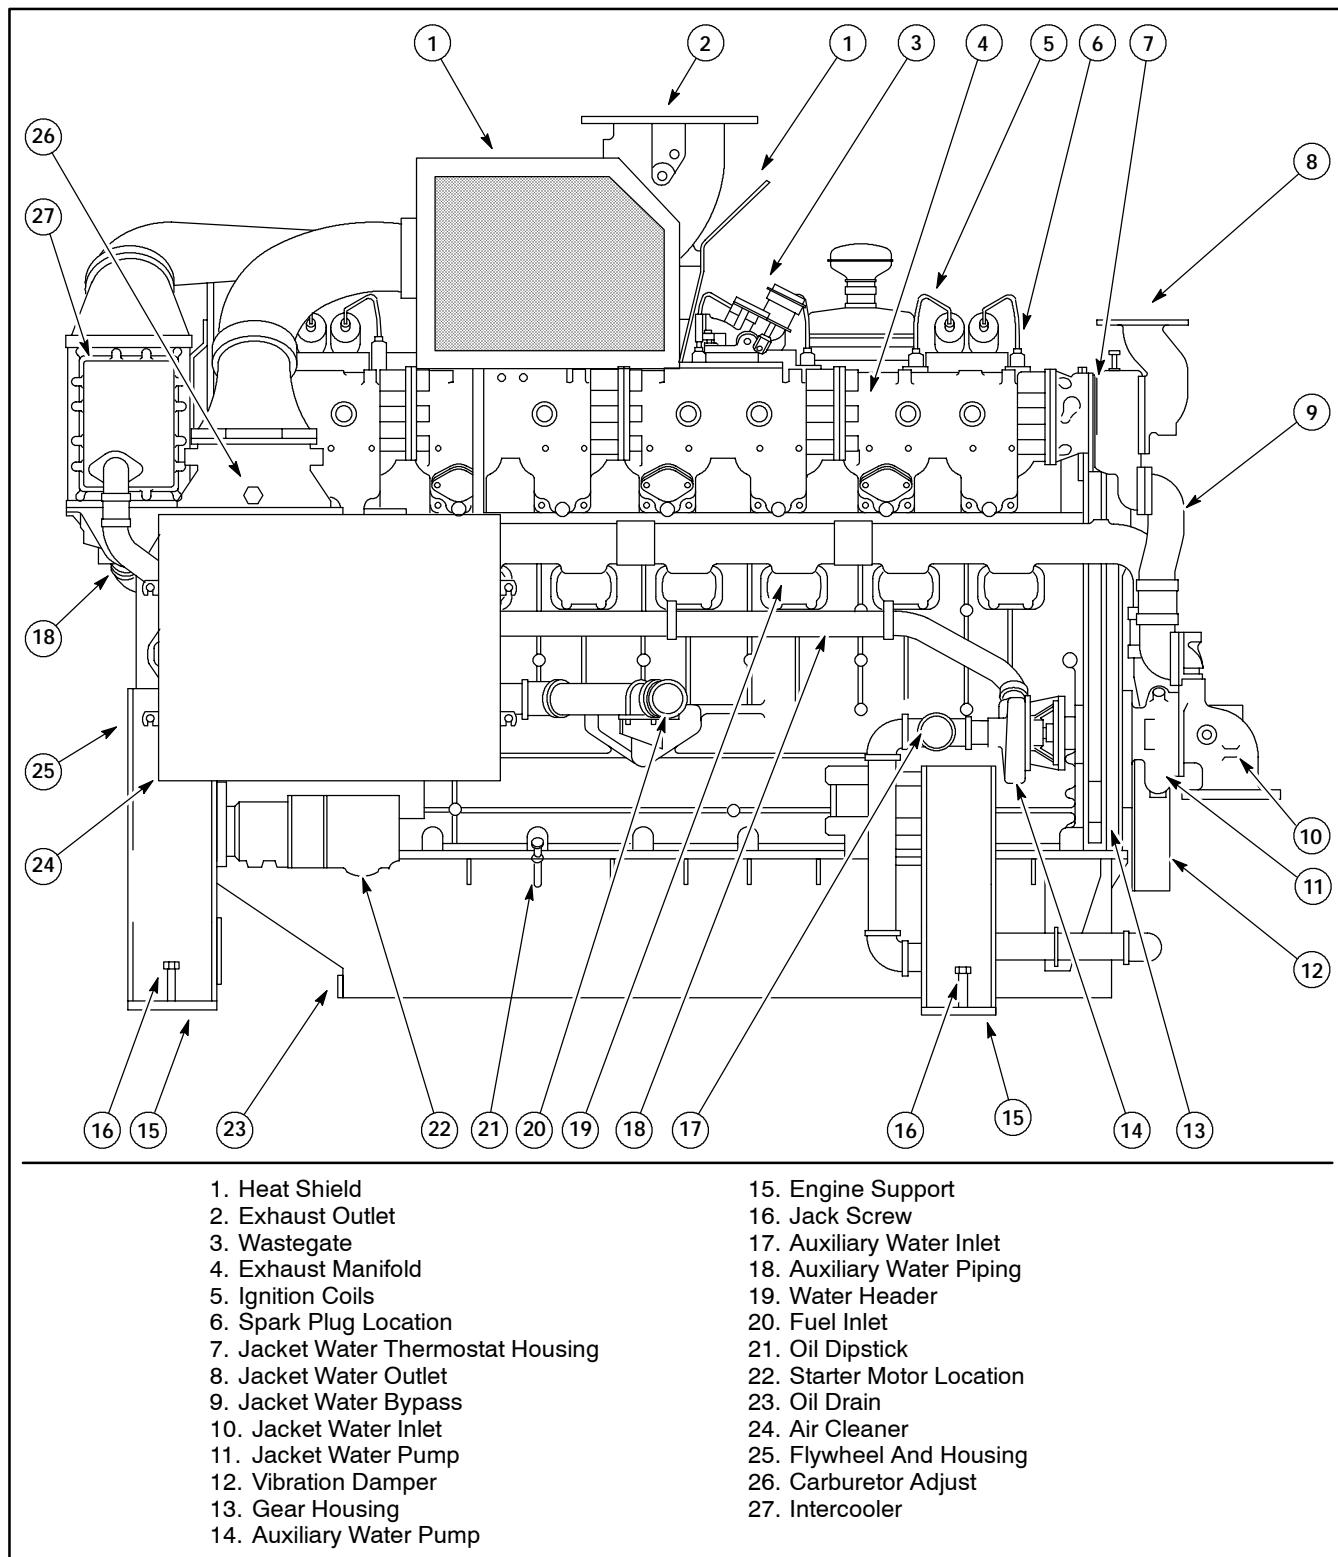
Right Side View - H24GLD, Impco Carburetor
